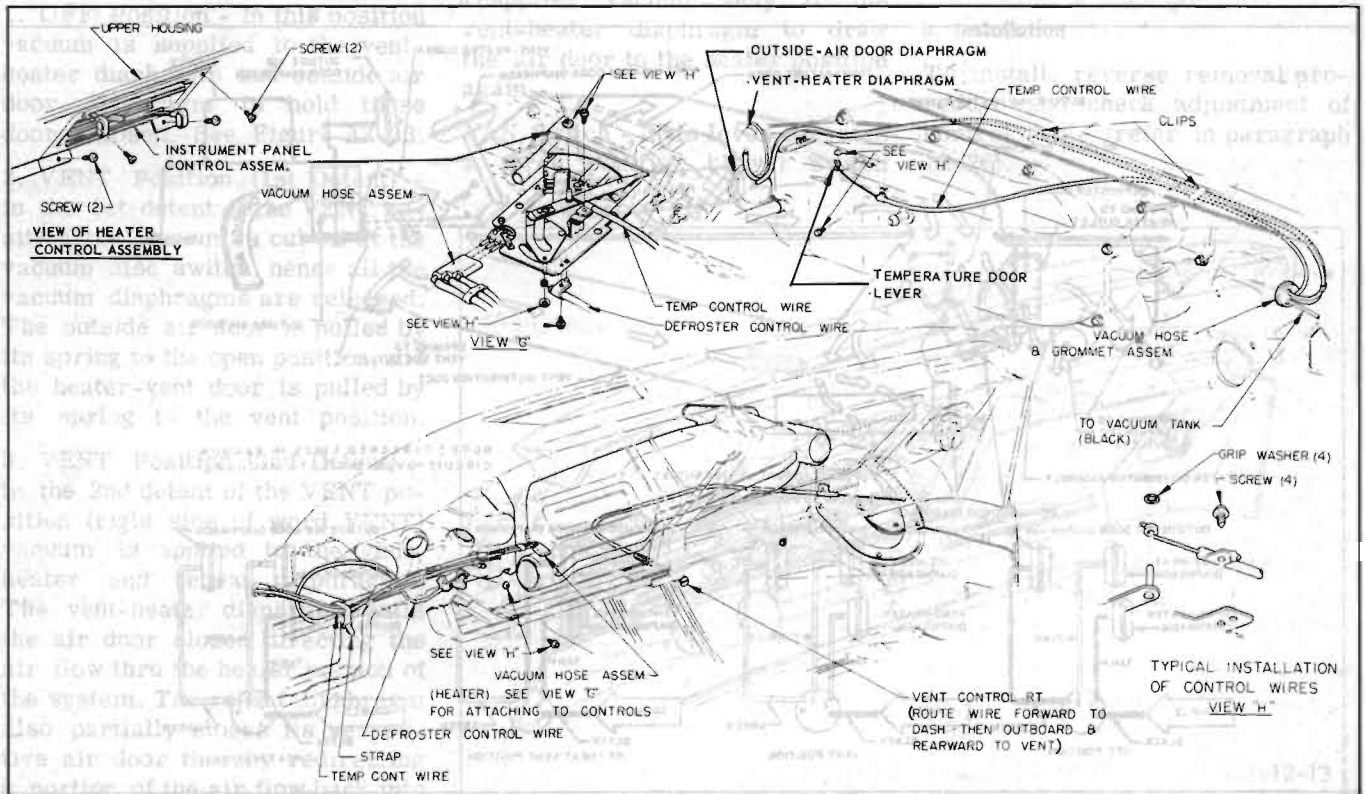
Vacuum Line and Control Cable Installation (49000 Series)
